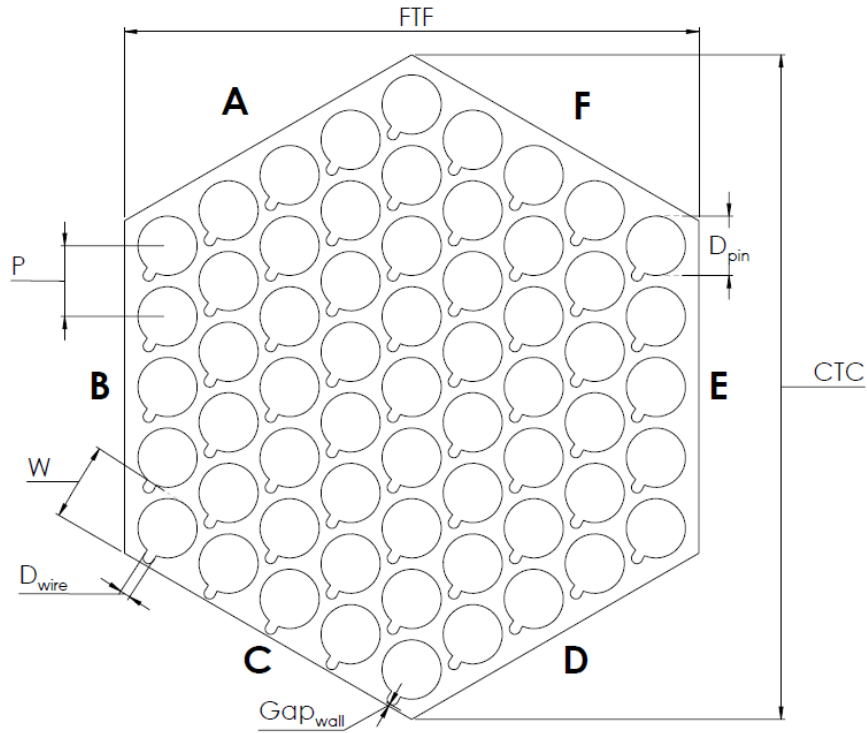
61-rod hexagonal fuel assembly primary dimensions
